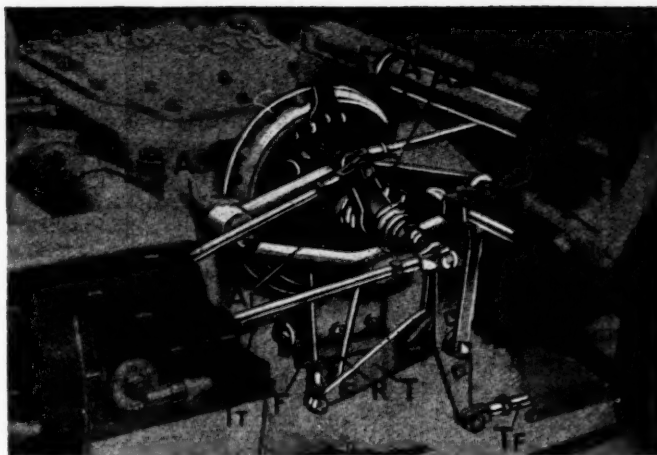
Rolls-Royce servo motor and its operating mechanism. A, brake pedal rod; A1, servo-operating lever; A2, rear brake operating lever; A3, rear brake operating rod; F, rod from servo actuating T; R, second rod from servo to T; T, lever operating four-wheel brakes; TF, rod to front brakes; TR, rod to rear brakes
